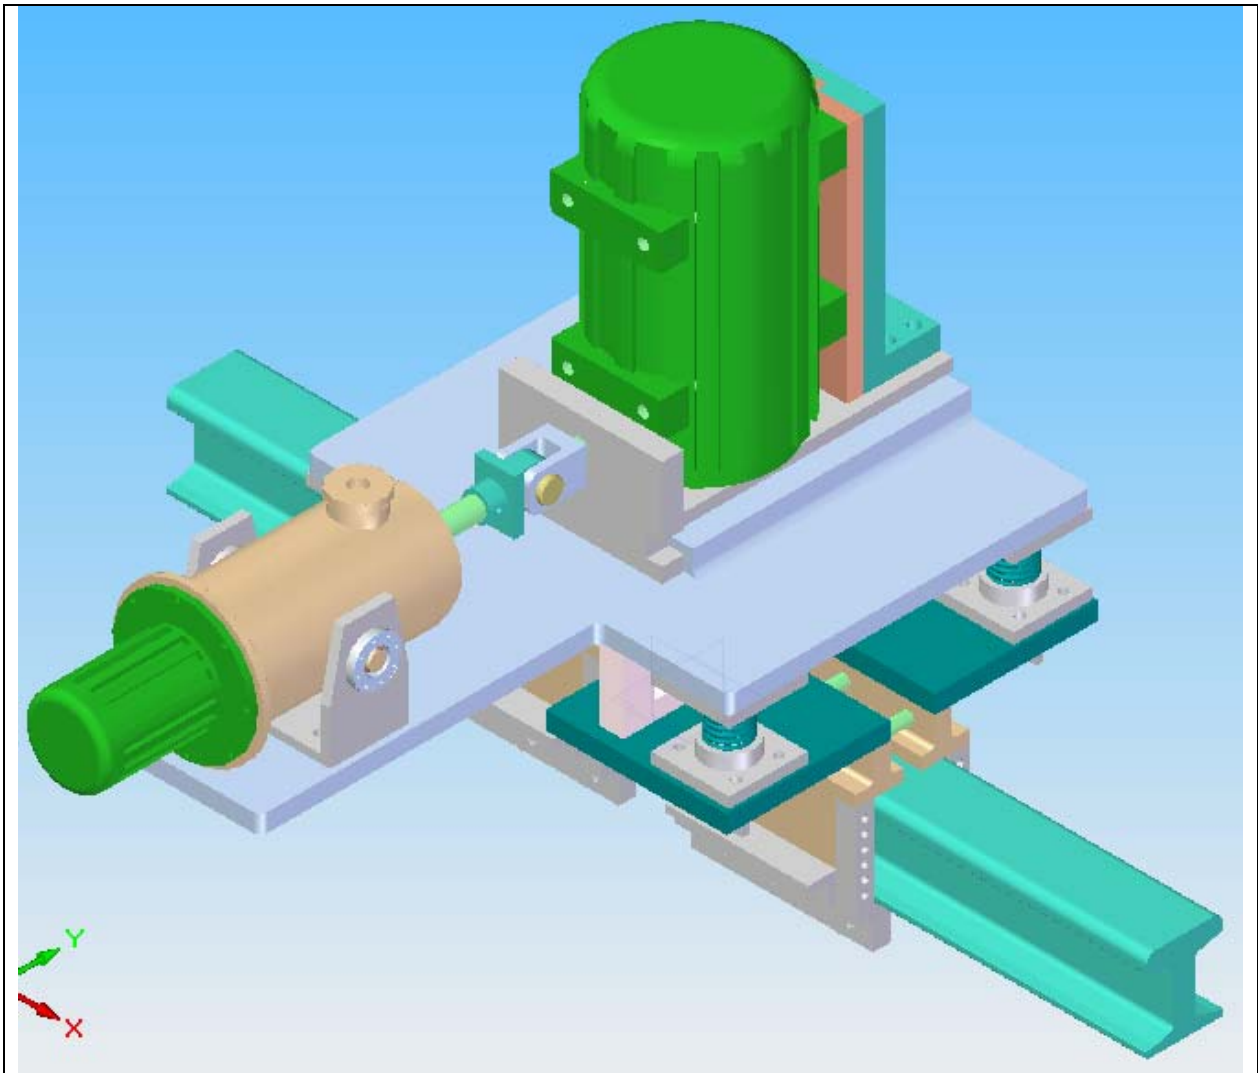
Final design of a friction stir welding machine for joining rail
